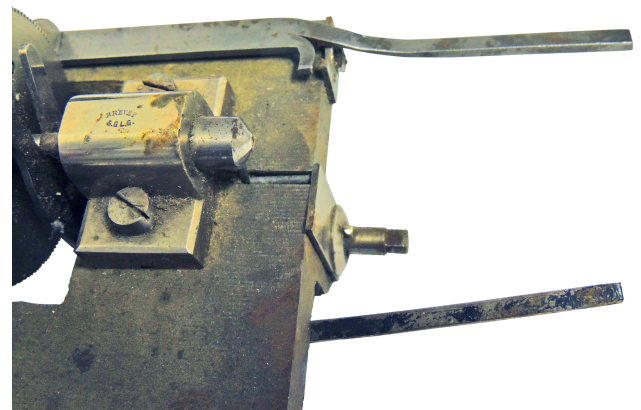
The rotating plate to hold the steel pin that locates the 'tailstock' bearing in its place
